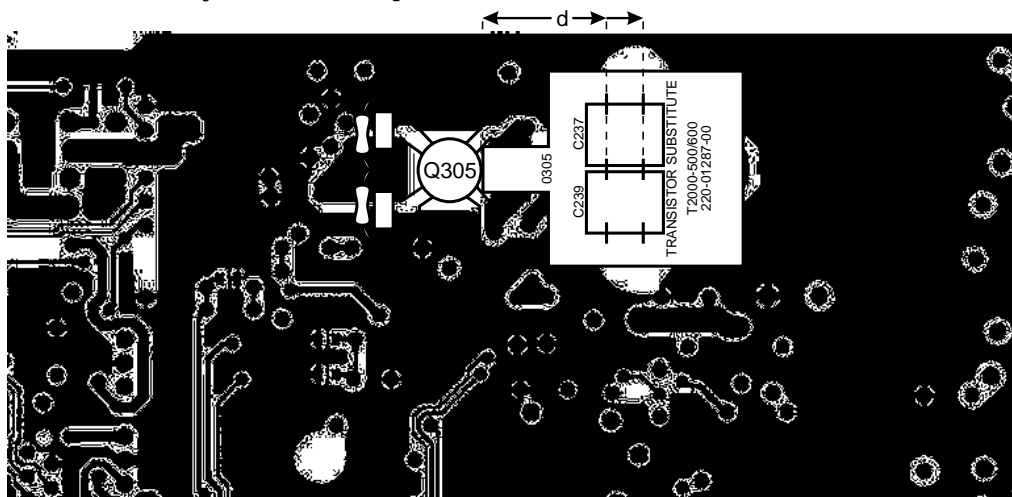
T2000-500/600 PA - Bottom Side
